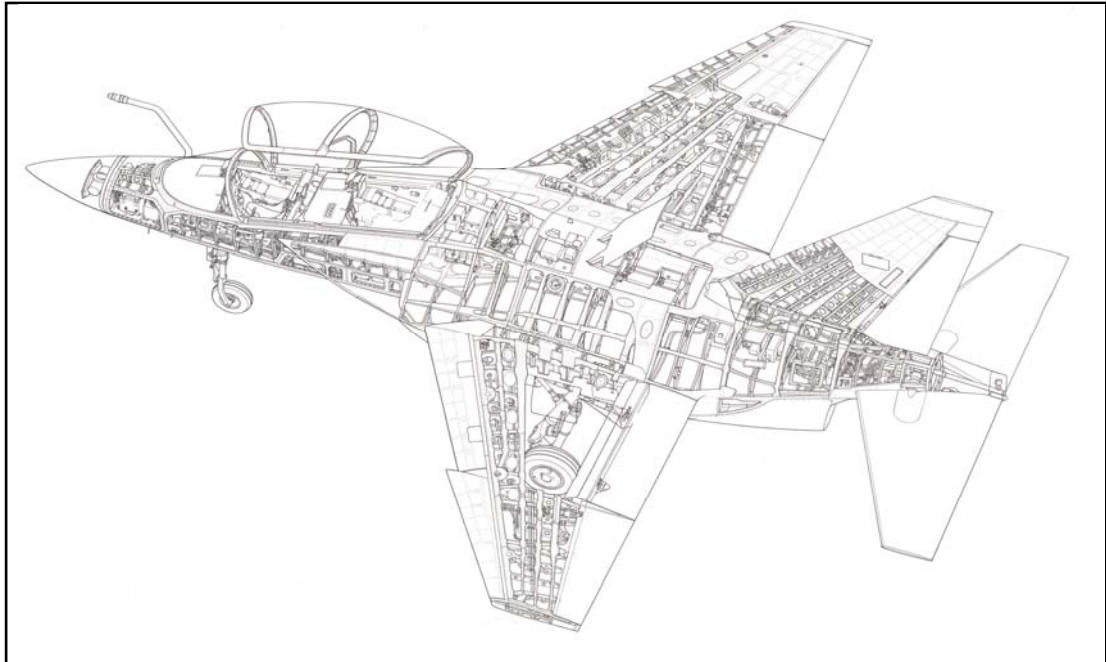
Aermacchi M-346 cutaway drawing [18]
